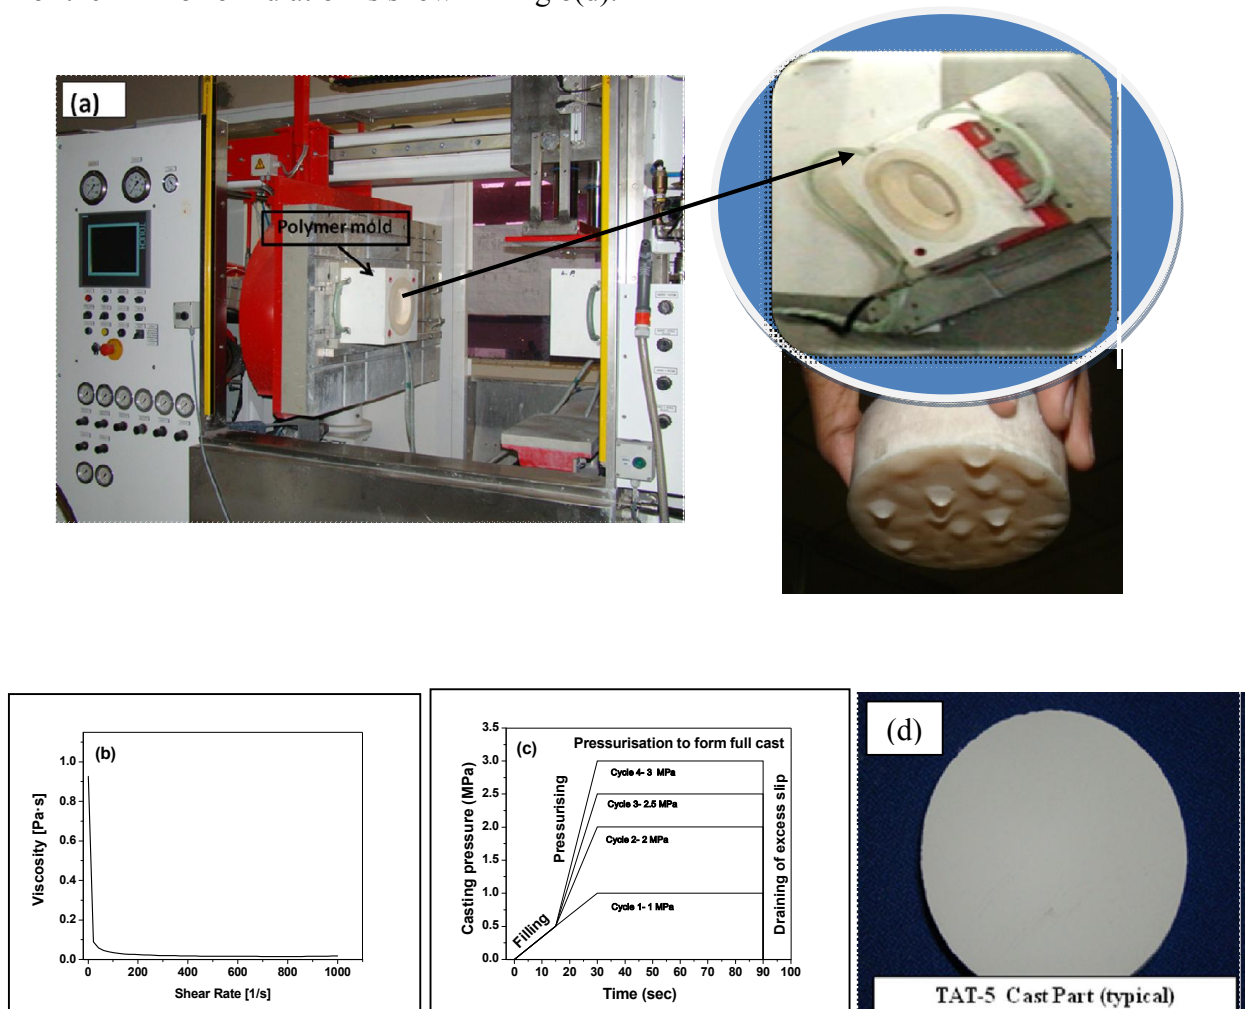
(a) Pressure casting machine, (b) viscosity versus shear rates of the TAT-5 slurry (c) Pressure casting cycle and (d) Cast part (Typical)
